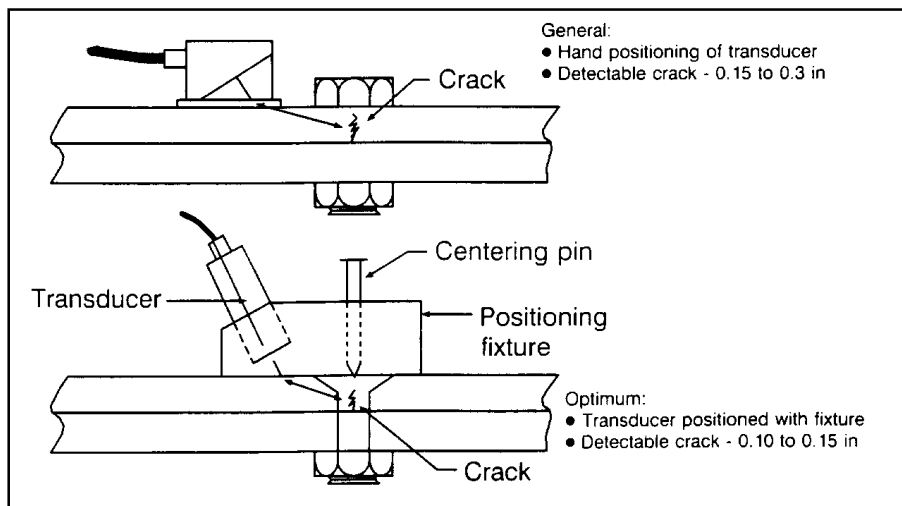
Example of the use if a transducer positioning fixture.
